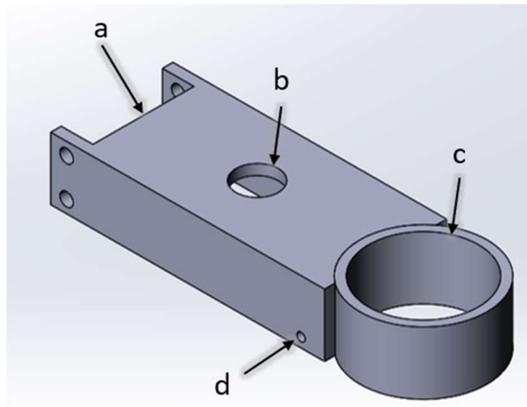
Nodal hold – (a) end that is attached to the rail guide, (b) hole for holding pneumatic piston, (c) circular section for applying pressure on the horn, (d) hole for attaching electric cables.
